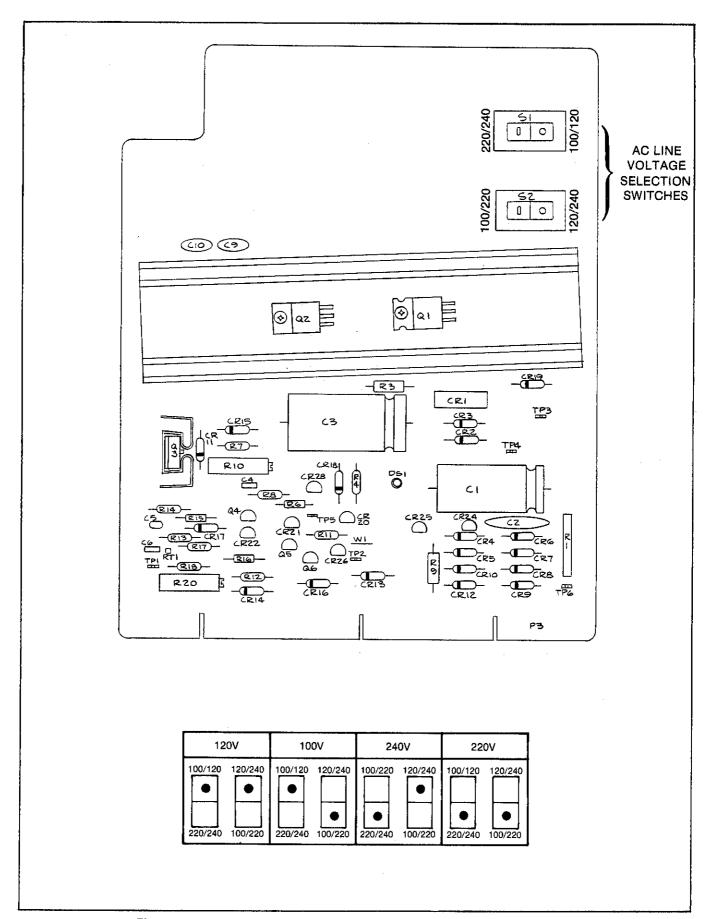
AC Line Voltage Conversion on A3 Pre-Regulator PCB Assembly
